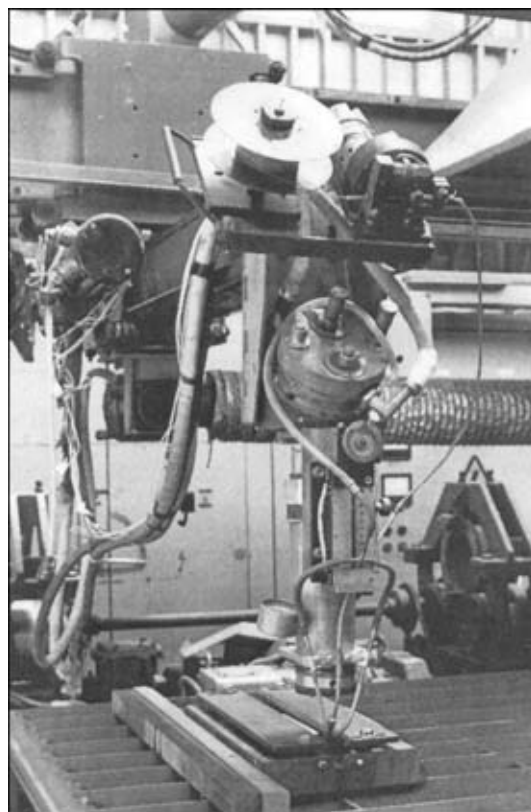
General view of the welding head for laser welding using filler wire
